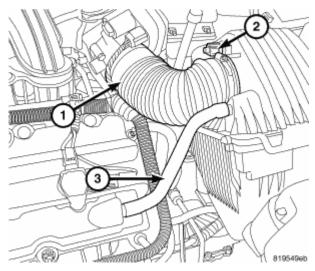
Identifying Air Cleaner Housing Cover Courtesy of CHRYSLER LLC
